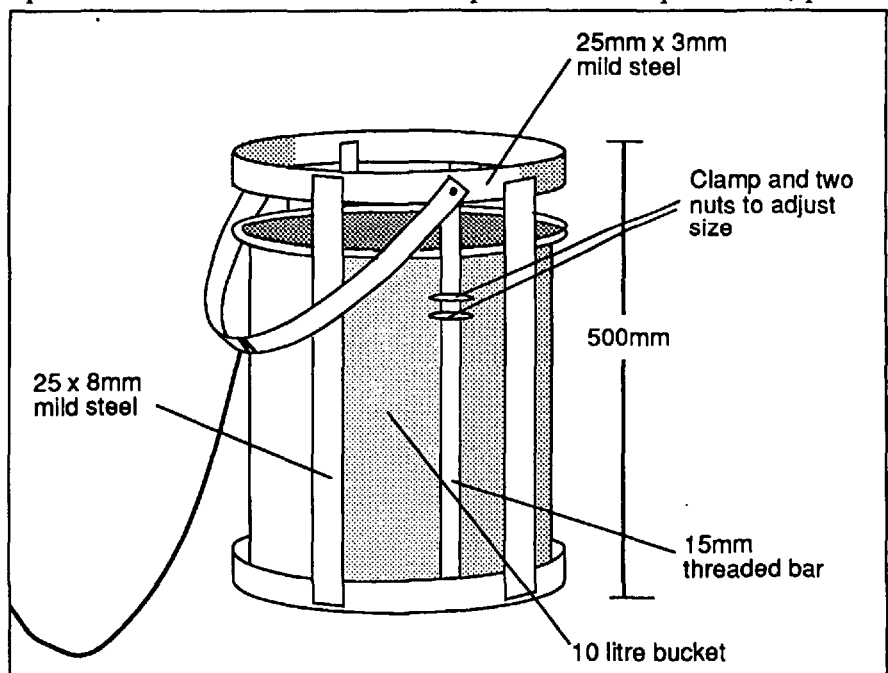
The third and final method was to construct a cage in which the bucket would be fixed.
